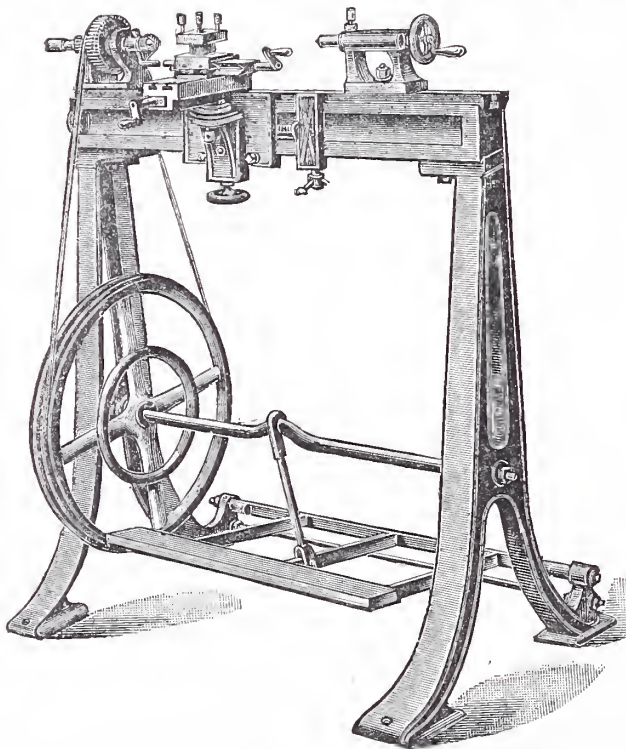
Price's "Universal" Lathe, with Front Slide and Canting Head.
